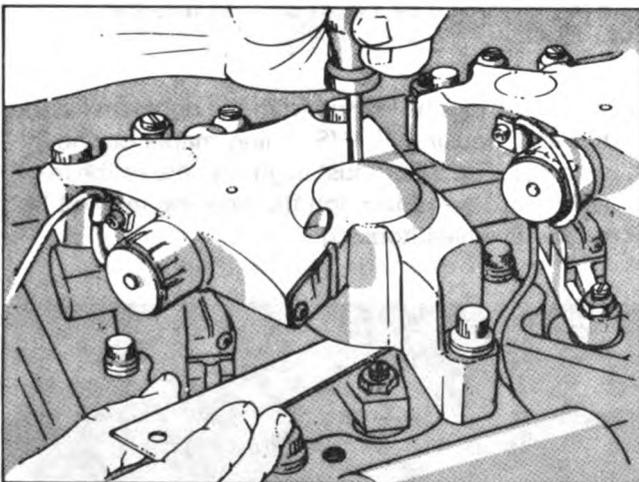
, (OM1063L). Adjusting crosshead to slave piston clearance
